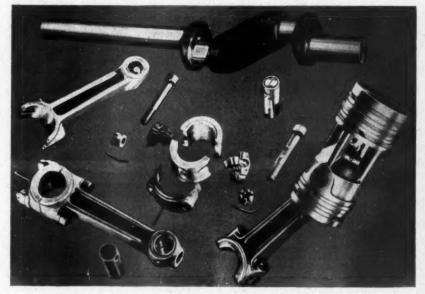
The connecting rods, connecting rod bearings, piston pin and crankshaft.
